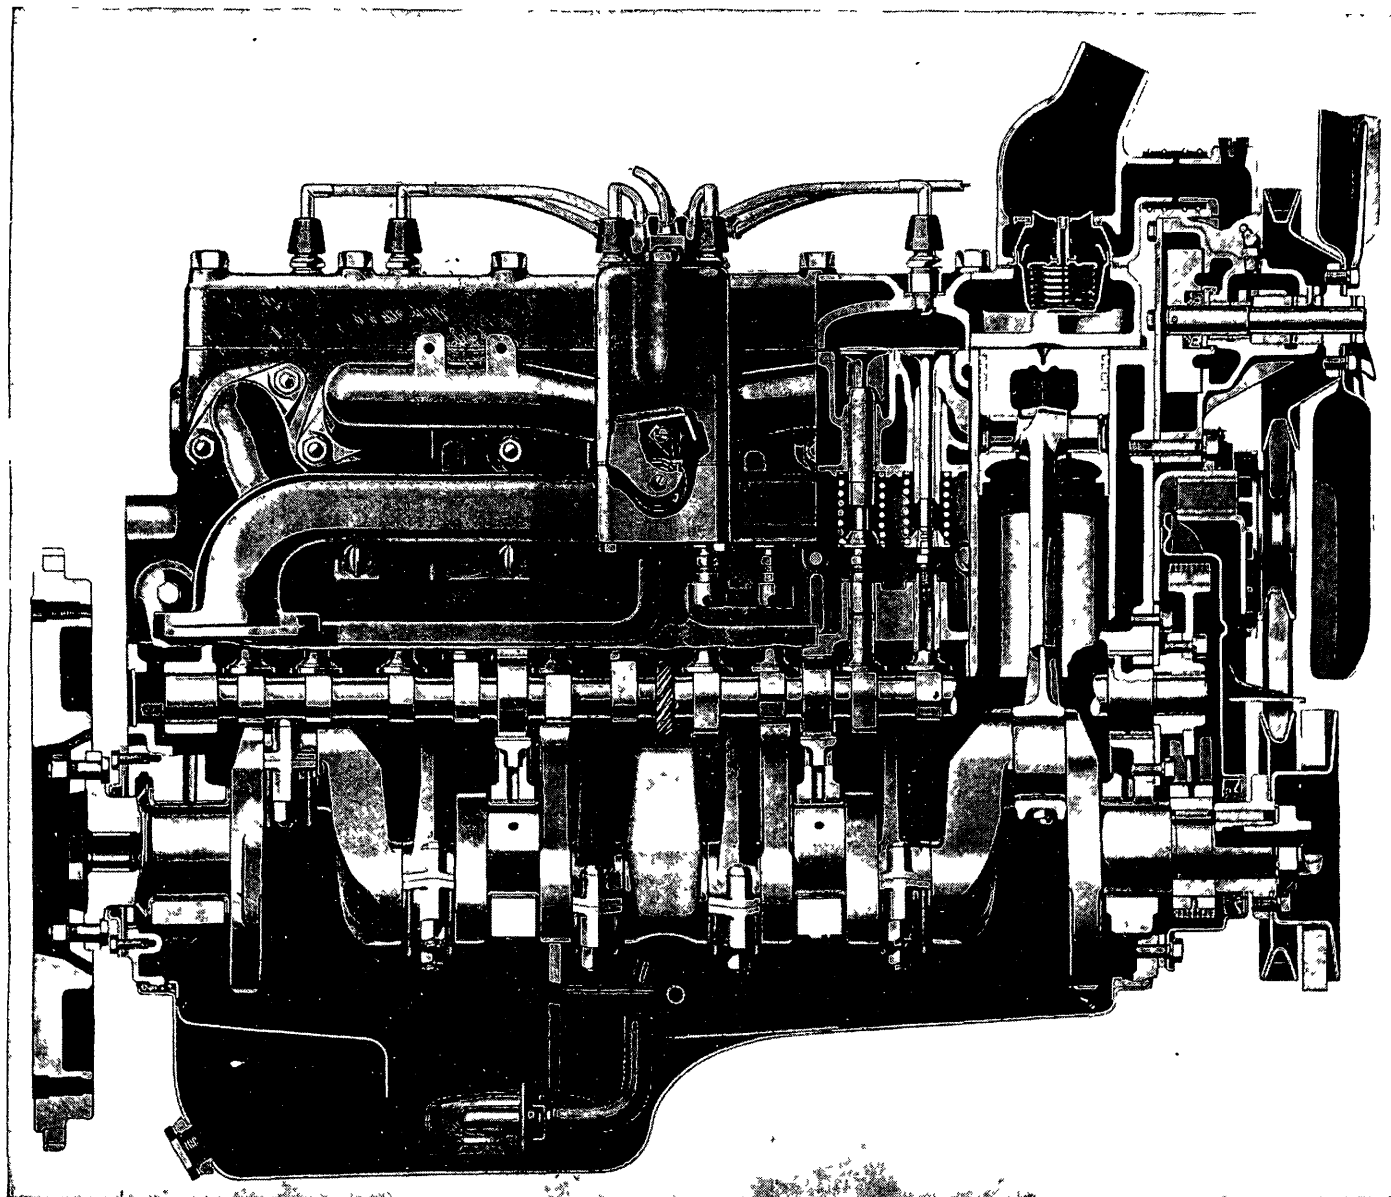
engine. Typical of all Chrysler-built sizes
